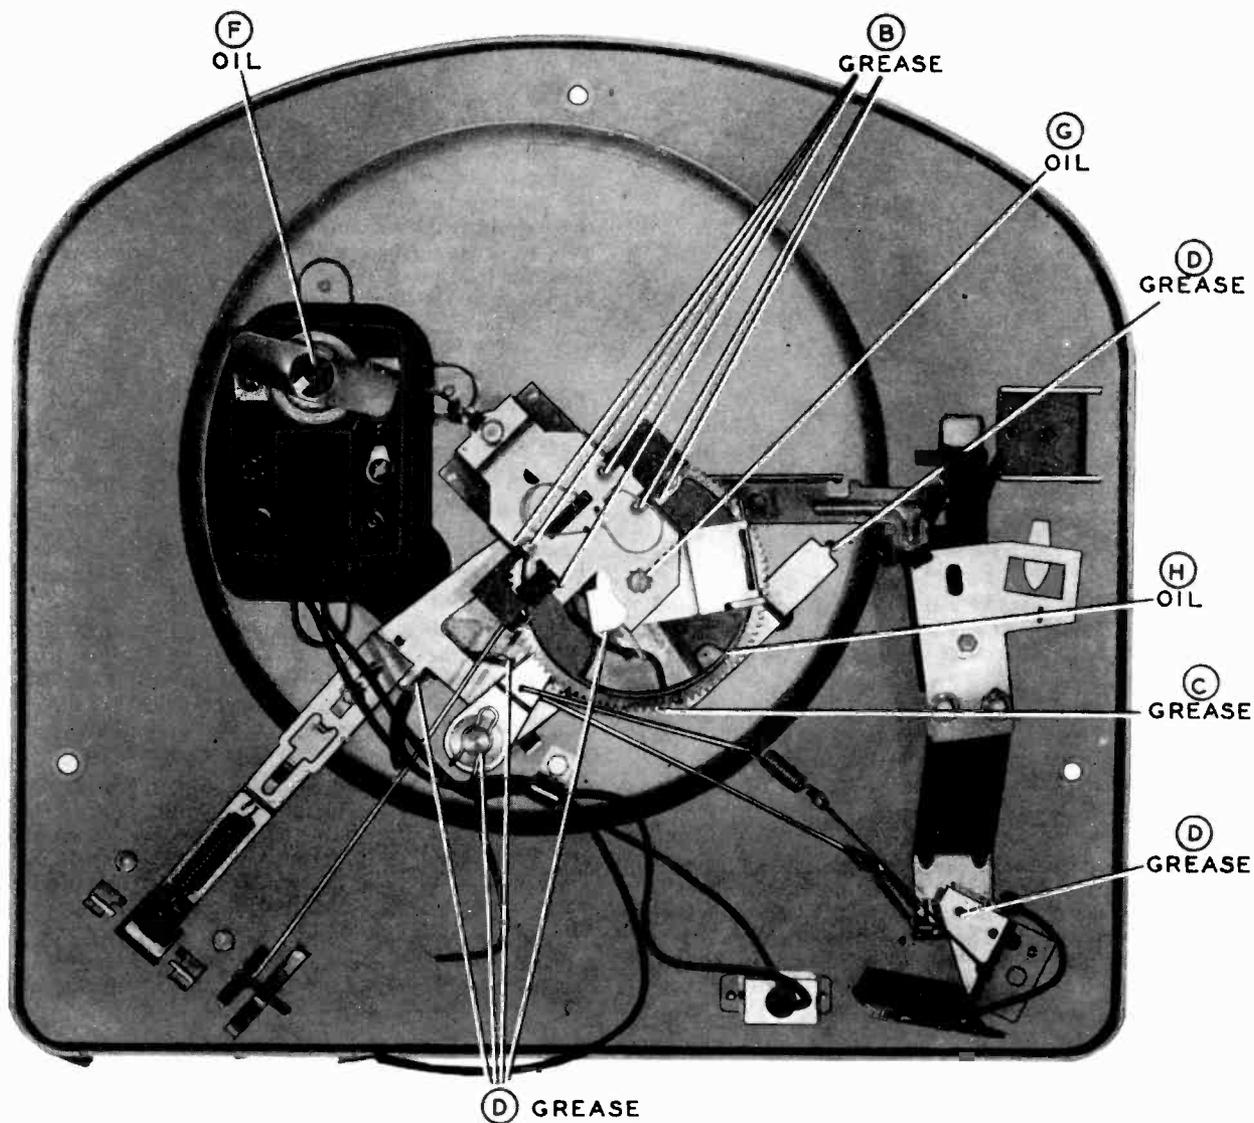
BOTTOM VIEW OF CHANGER, SHOWING LUBRICATION POINTS
